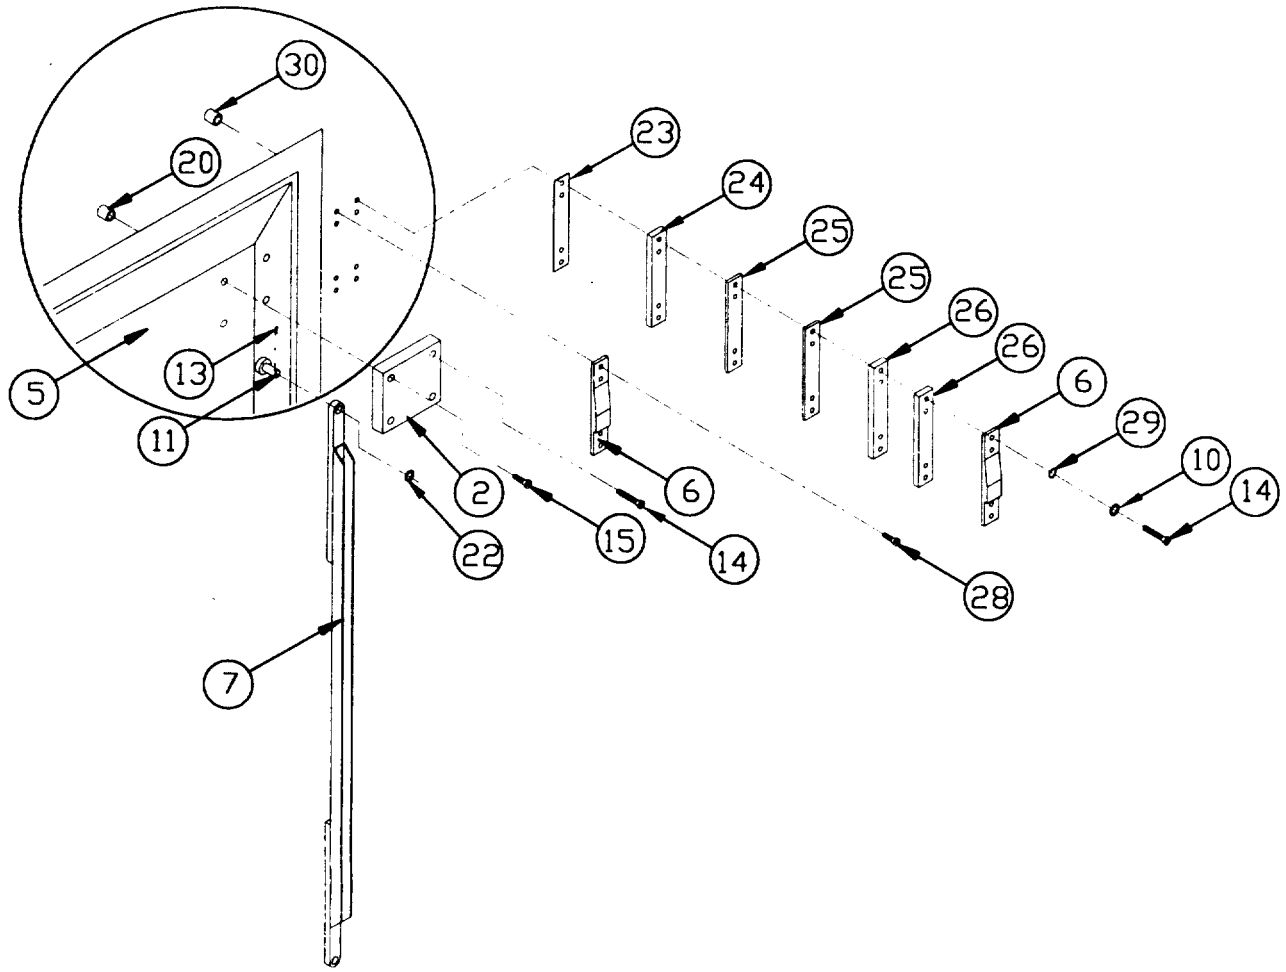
DOOR ASSEMBLY (SHEET 1 OF 5)
